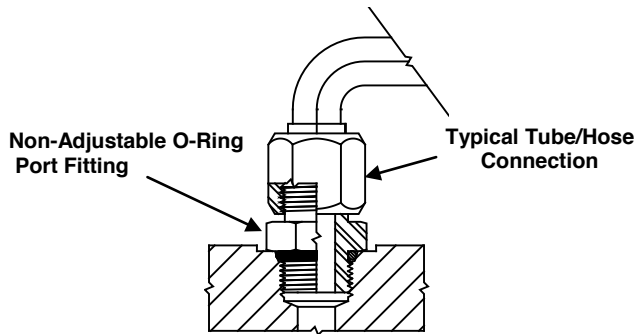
Typical Non-Adjustable Stud End O-Ring Port Installation
